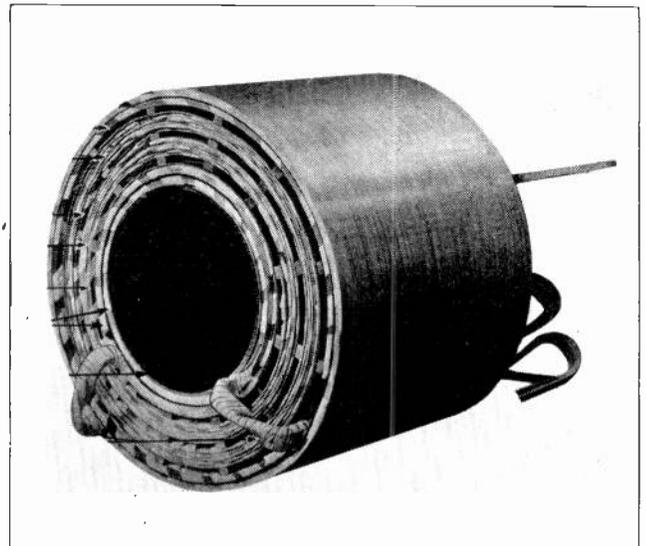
This view shows a transformer winding which is built up in layers that are spaced apart with wood strips to allow circulation of cooling oil through the winding. (Photo courtesy General Electric Co.)
